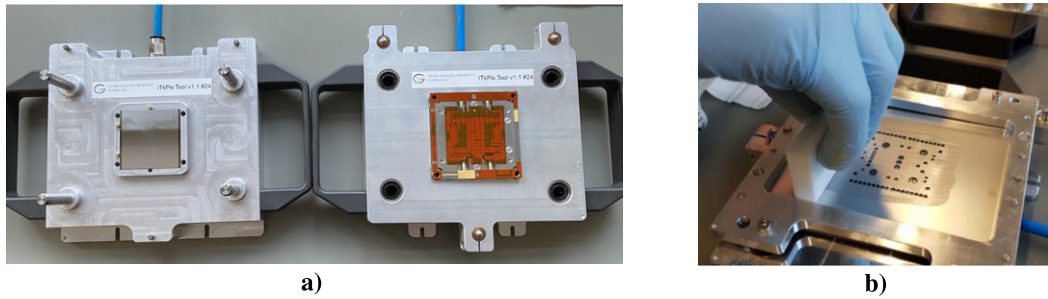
The module assembly is performed with a common tool, allowing precise mating of two jigs and thus assembly of a module with $50 \mu\text{m}$ precision. (a) Quad module tooling consisting of two jigs, one holding the bare module and the other the flex (with glue applied in this case). (b) Application of the glue with the spatula on the stencil sheet.
